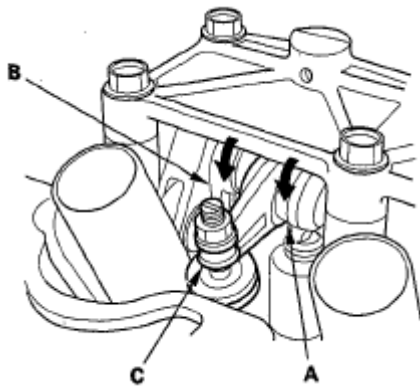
Locating Intake 2nd Rocker Arm And Intake 3rd Rocker Arm
